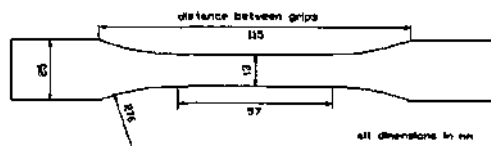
Shape and dimensions of a Type I test specimen using ASTM D638.
